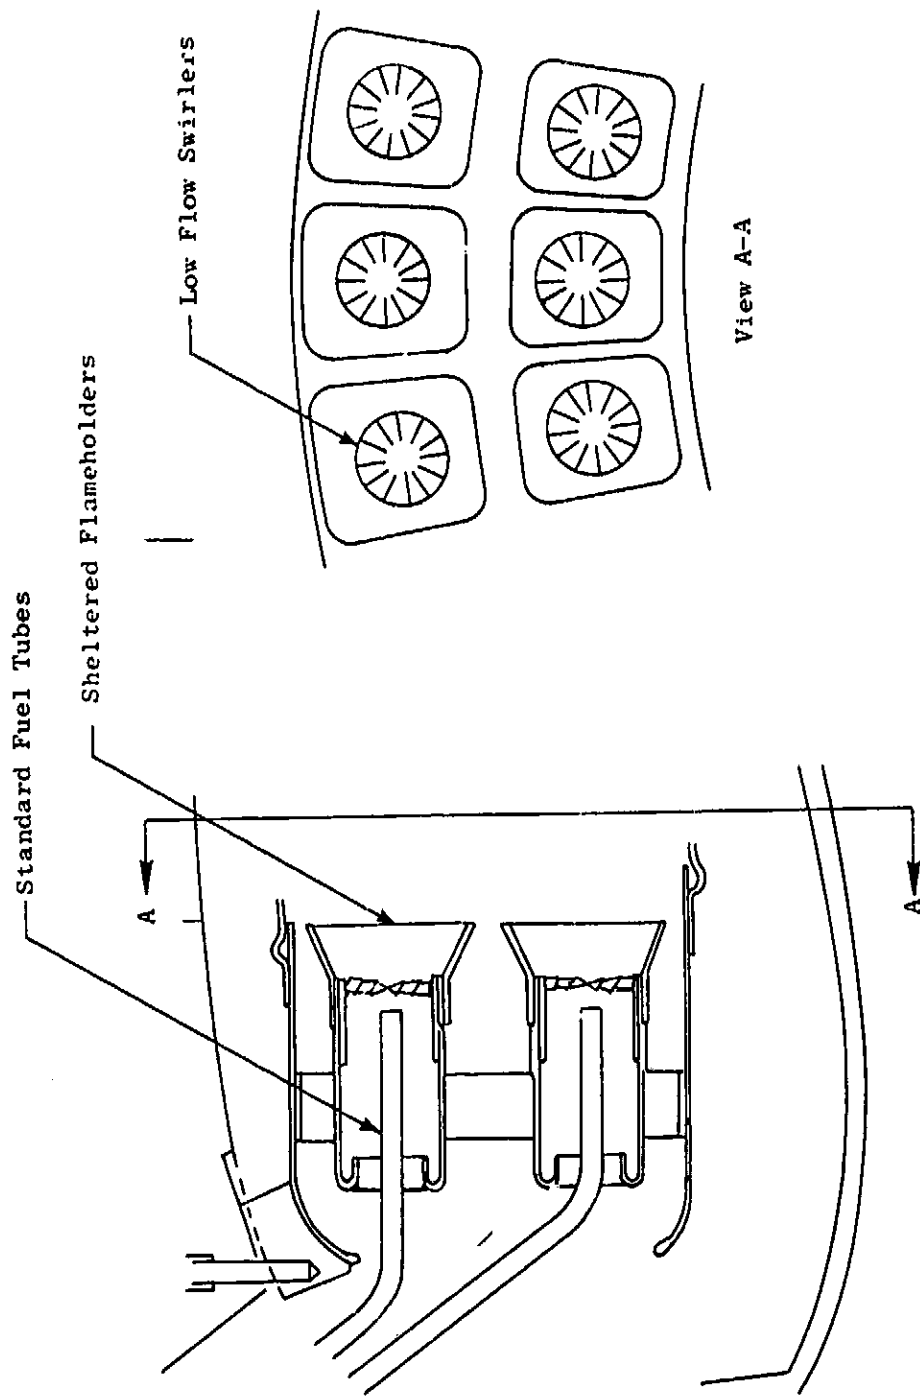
90-Swirl-Can/Sheltered Flameholder Combustor Design.
